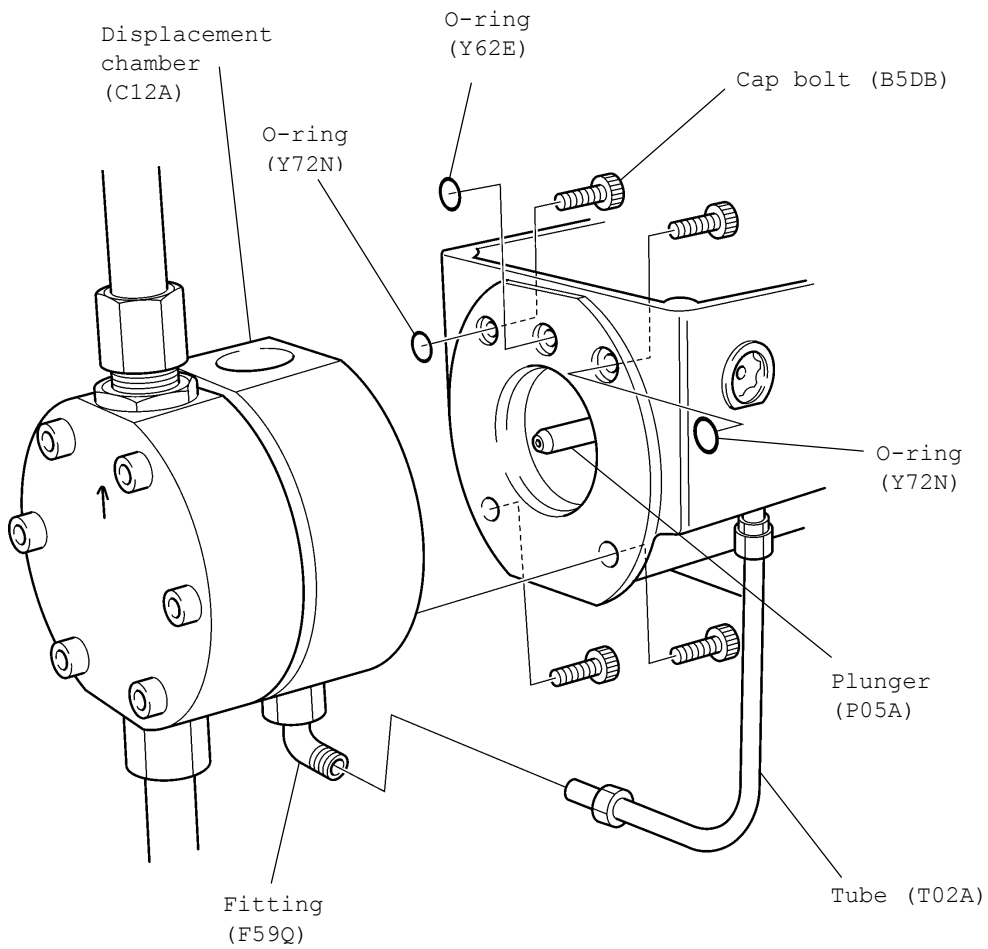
Removal of displacement chamber (DV-1.8)
